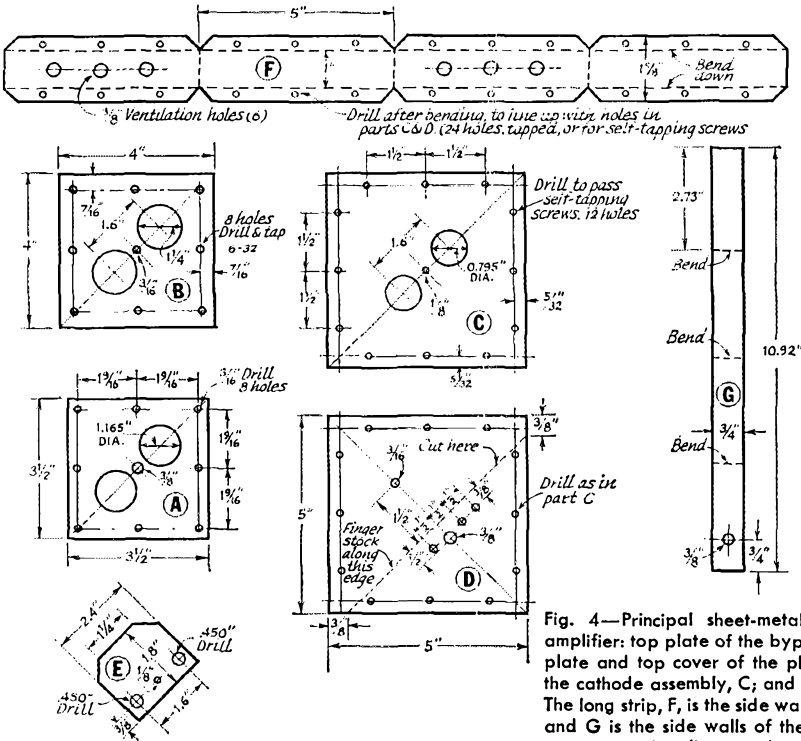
Principal sheet-metal parts of the 1296-Mc. amplifier: top plate of the bypass capacitor, A; its bottom plate and top cover of the plate cavity, B; top plate of the cathode assembly, C, and two-piece bottom cover, D. The long strip, F, is the side walls of the cathode assembly, and G is the side walls of the plate cavity, both before bending into their square shape.
